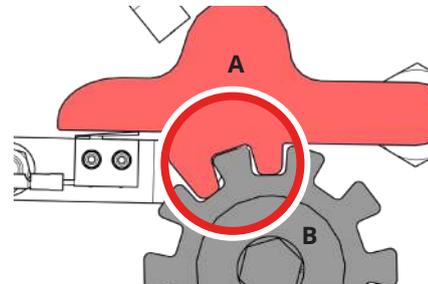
A - Brake hammer (A) engaging correctly with the cut-outs of the brake disc (B).
